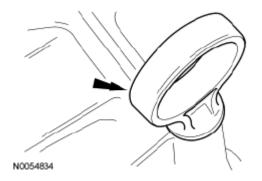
Locating Oil Level Indicator Courtesy of FORD MOTOR CO.
